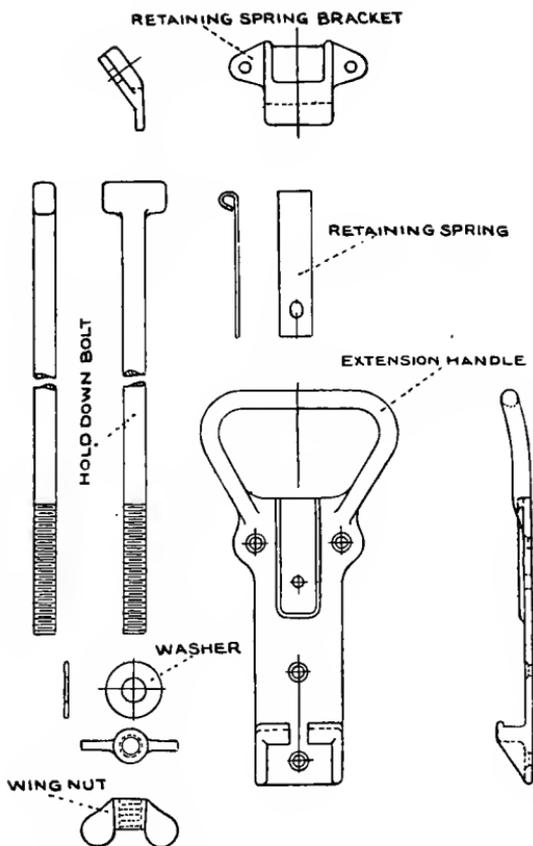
Details of Cover Retaining Clip and Hold-Down Attachment.
